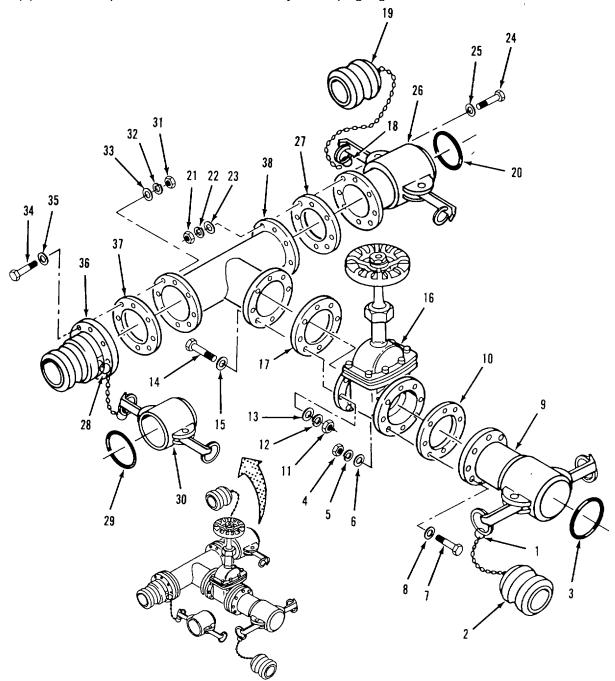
Tee and Gate Valve Assembly (9114-Y6) Disassembly.
